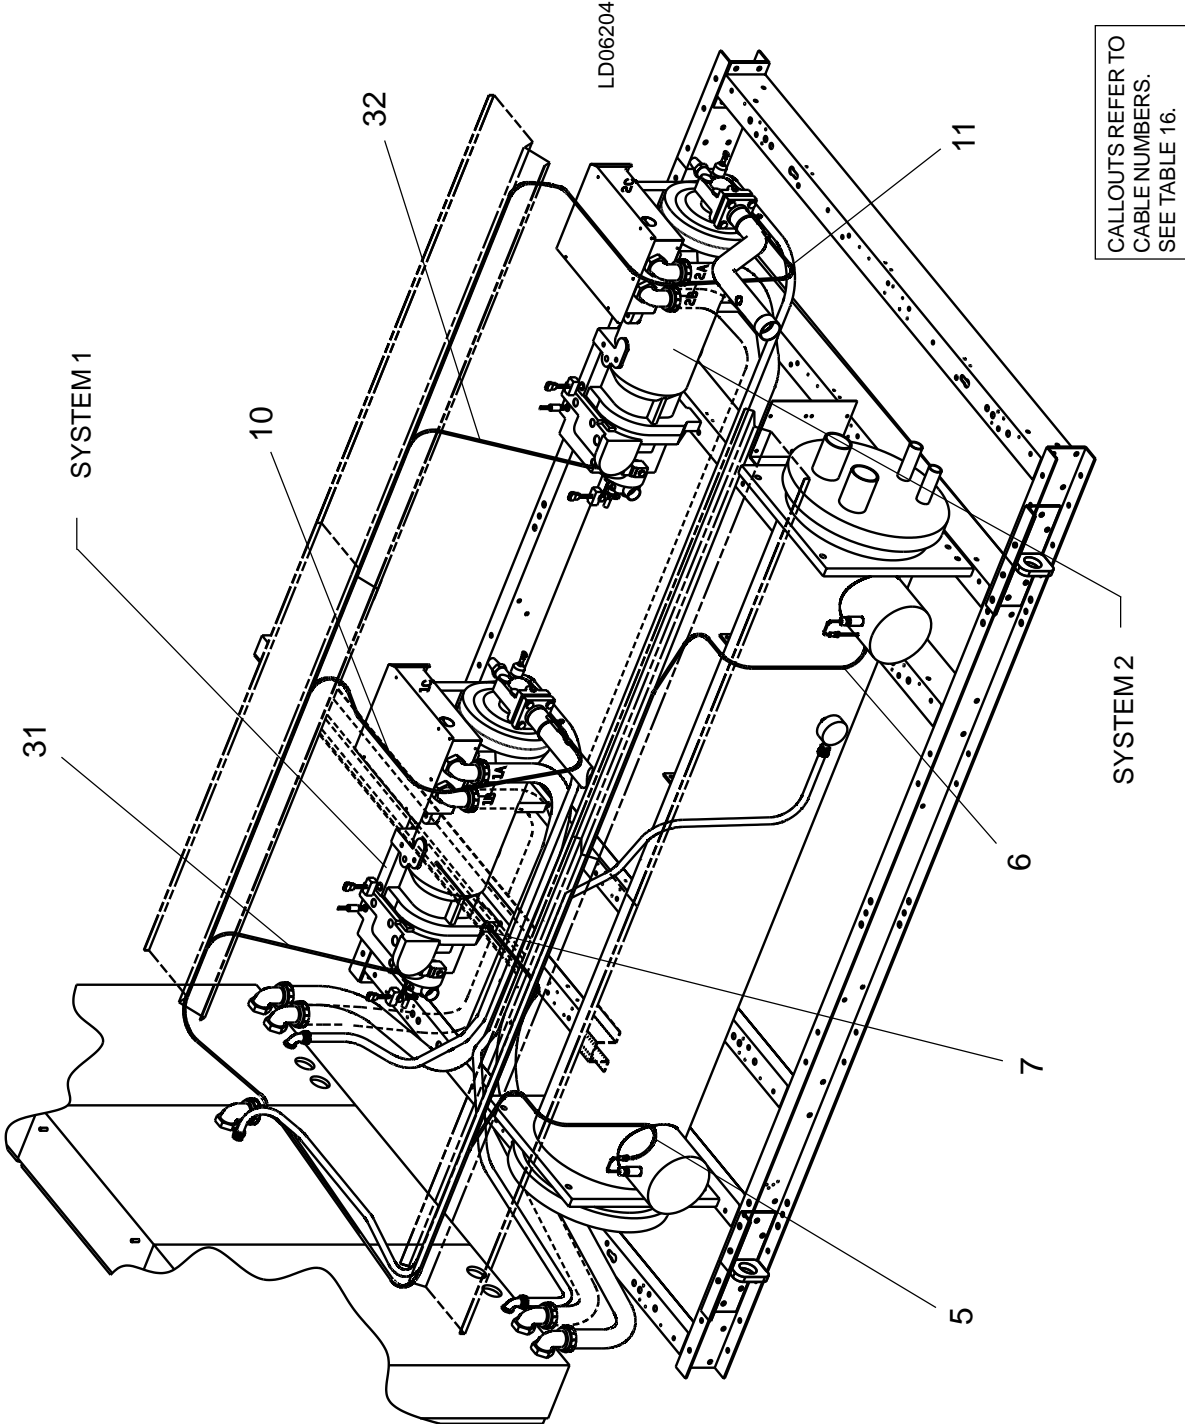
HARNESS LAYOUT (REF. TABLE 16, PAGE 33)
